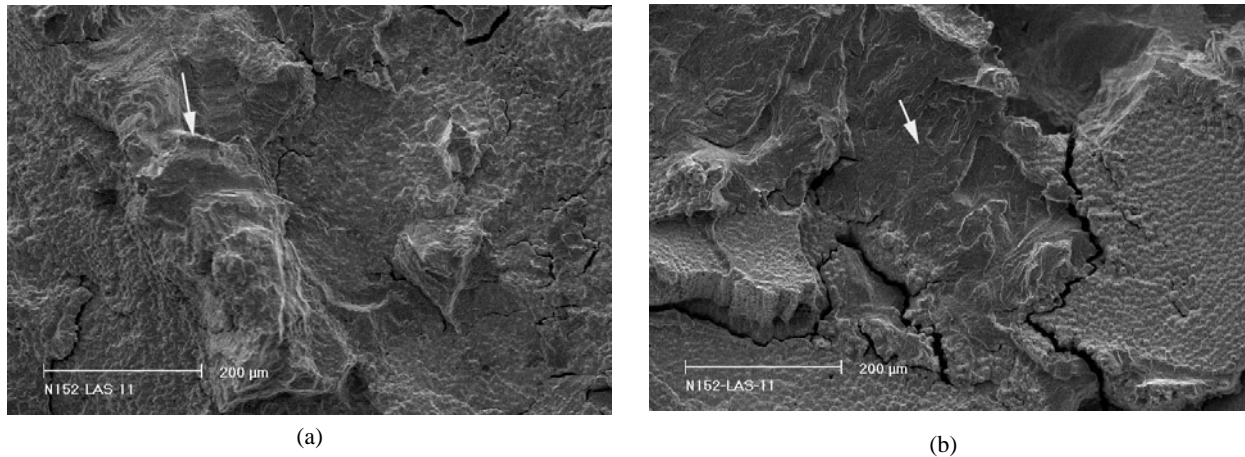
Fracture surface of specimen N152-LAS-11 at location: (a) 7, and (b) 8 in Fig. 21. Arrows indicate unbroken ligaments. Crack advance is from bottom to top.
